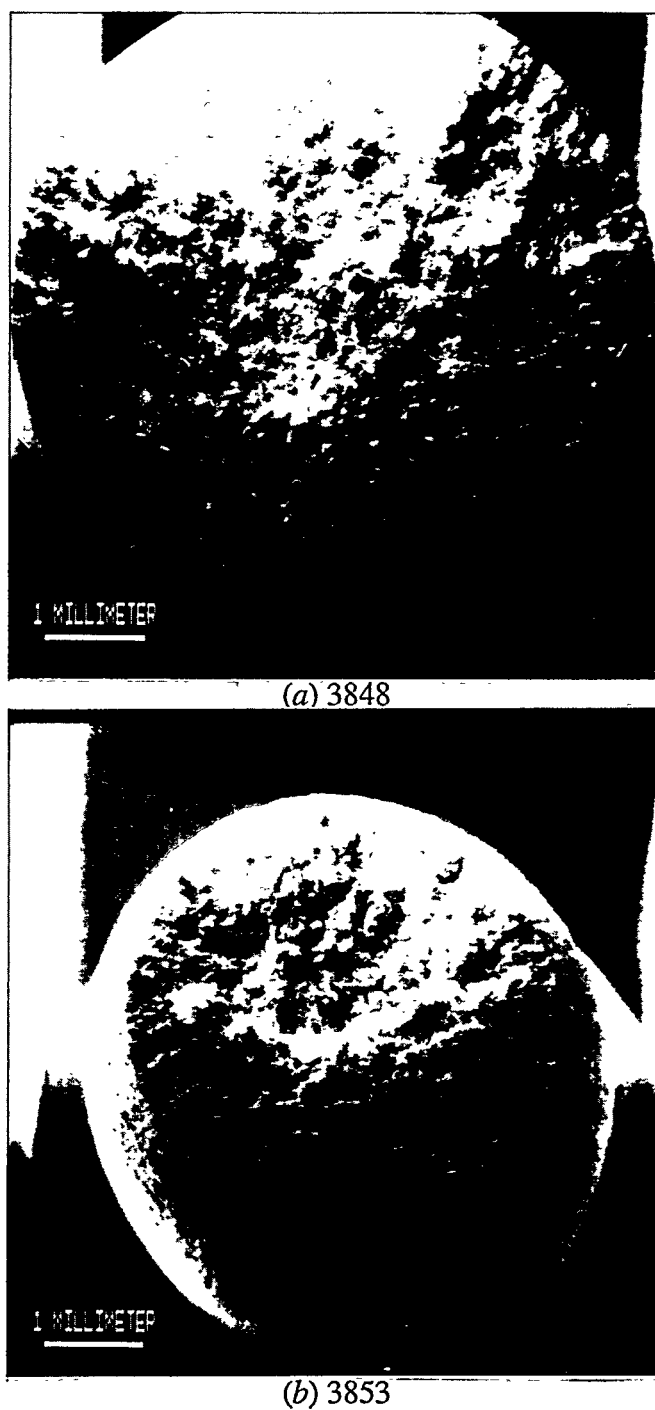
Fracture surfaces of room-temperature tensile-tested specimens from: (a) air-melted and (b) vacuum-melted and extruded bar of FAPY.
